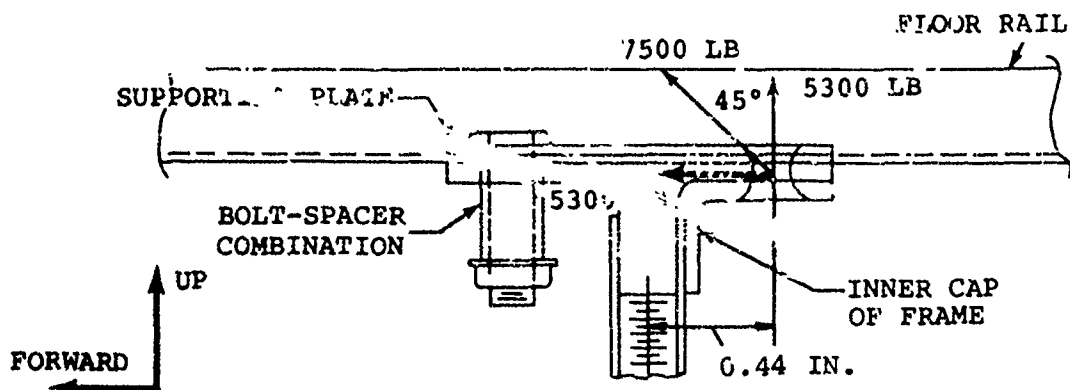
Supporting Structure Loads, Isolated Floor Rail Seated on Floor Frame, 7.5K Restraint Load Applied at a 45-Degree Angle.
